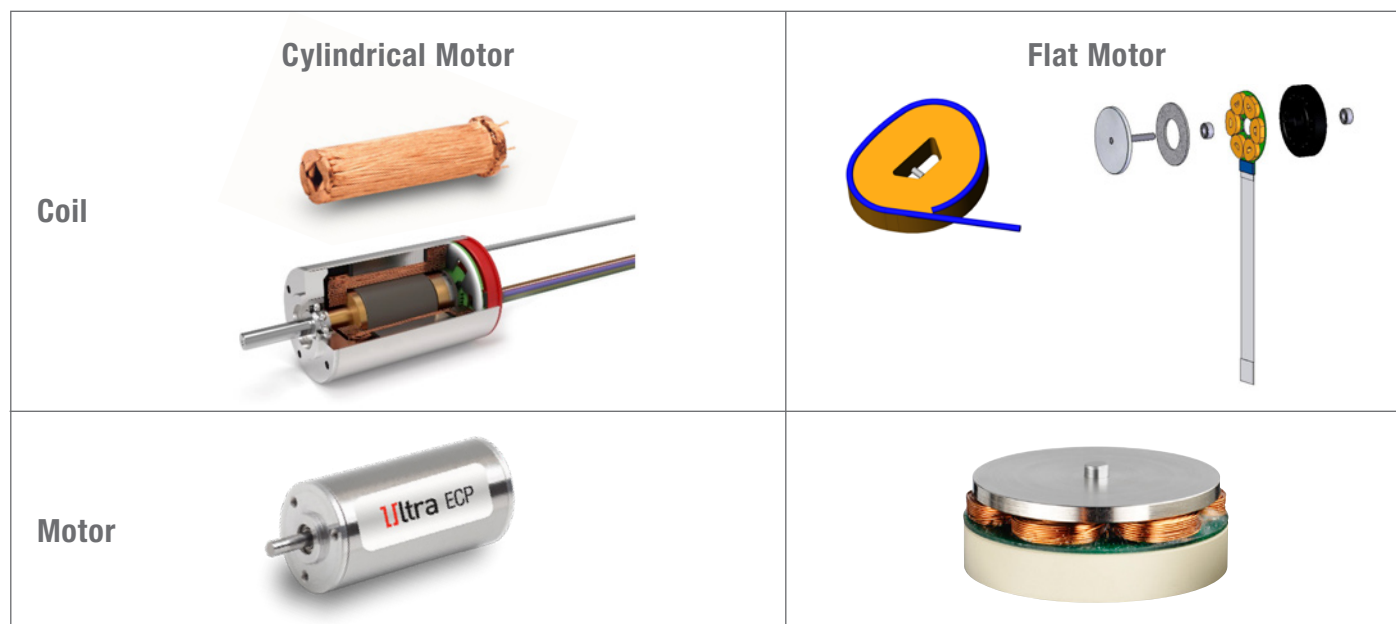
Interior View of Cylinder Motor and Flat Motor
